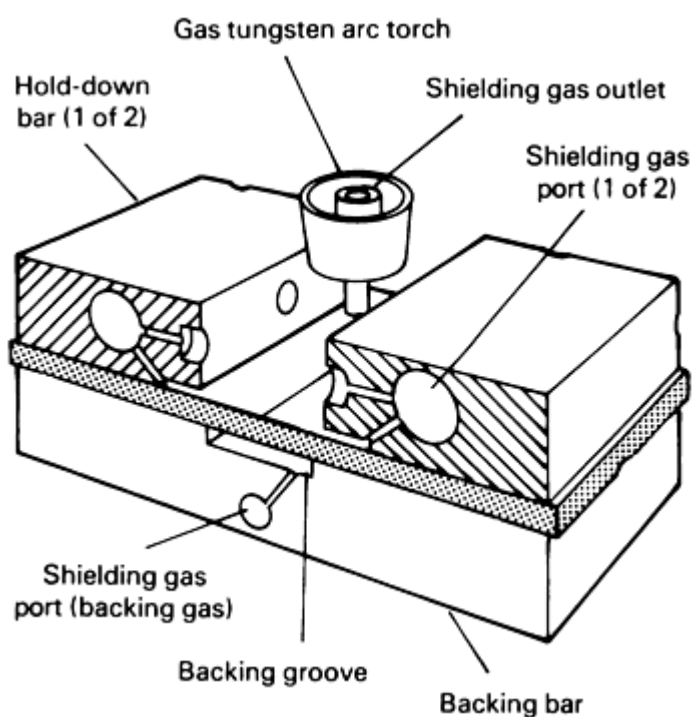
SETUP FOR INERT GAS SHIELDING FOR GTAW OF TITANIUM ALLOYS OUTSIDE A WELDING CHAMBER. GAS SHIELDING IS FROM THE TORCH AND THROUGH PARTS IN HOLD-DOWN BARS, BACKING BARS, AND FROM TRAILING AND BACKUP SHIELDS.
